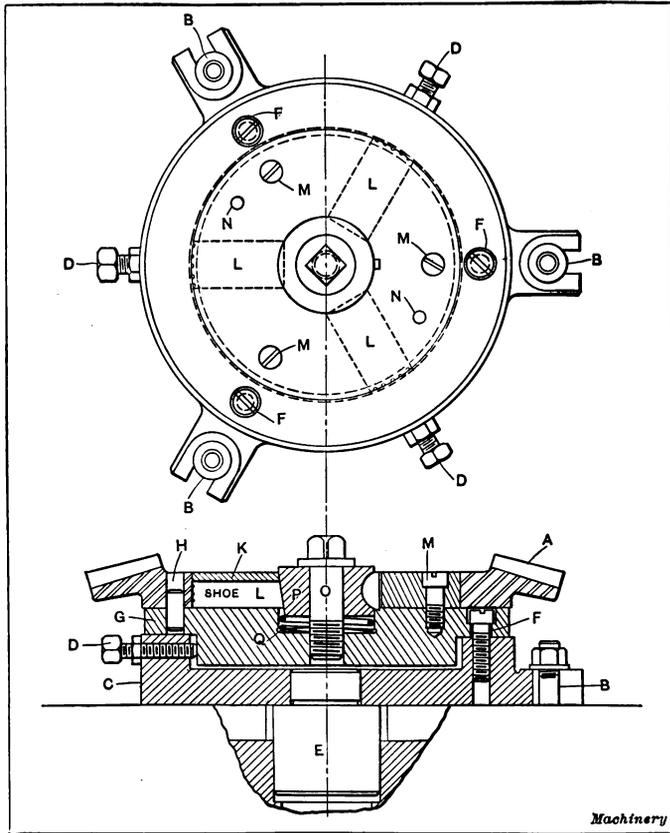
Vertical Boring Mill Fixture for holding Bevel Gear—The Three Shoes L are forced outward by Plug in Center
